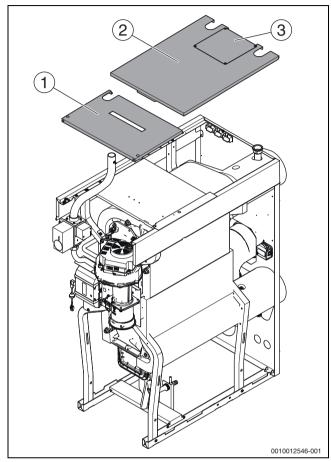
Front and rear boiler cover (with boiler rating 150 - 300 kW)
